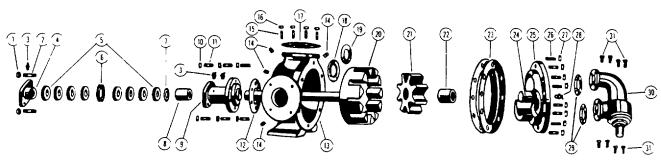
EXPLODED VIEW MODEL Q32, M32, AND N32 PUMP
